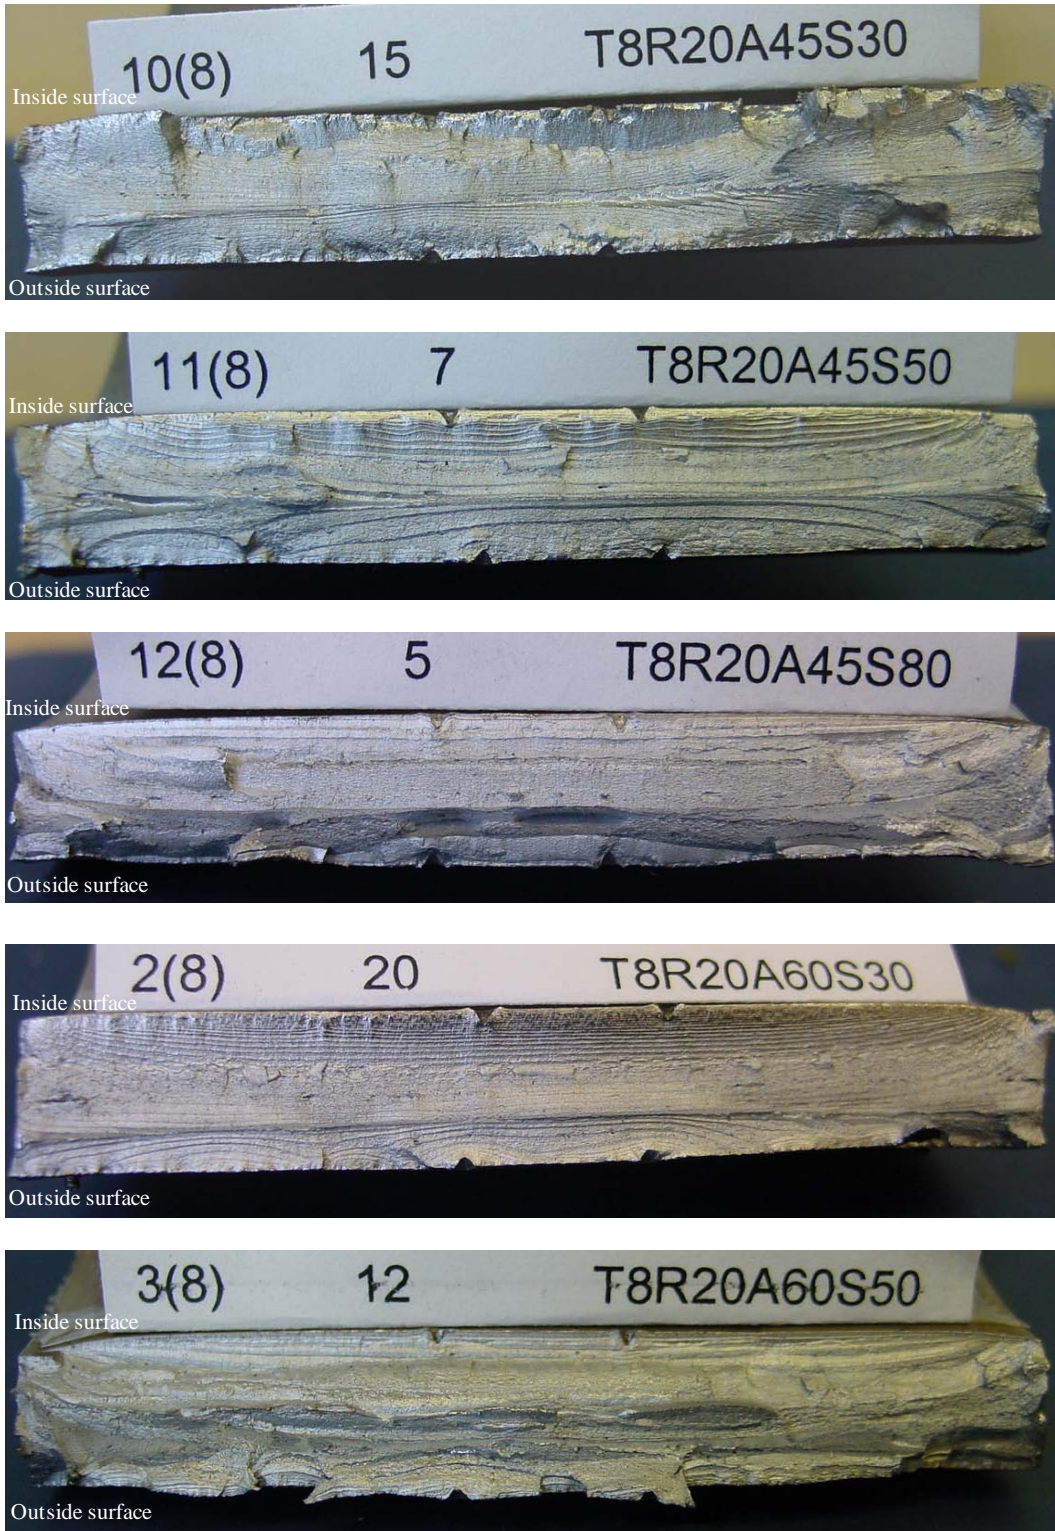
Pictures of fracture surface: strip specimen series of T8R20
